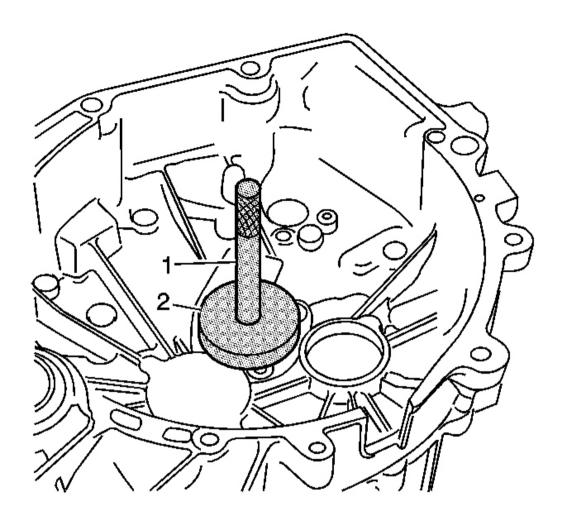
Installing Input Shaft Bearing Courtesy of GENERAL MOTORS CORP.
